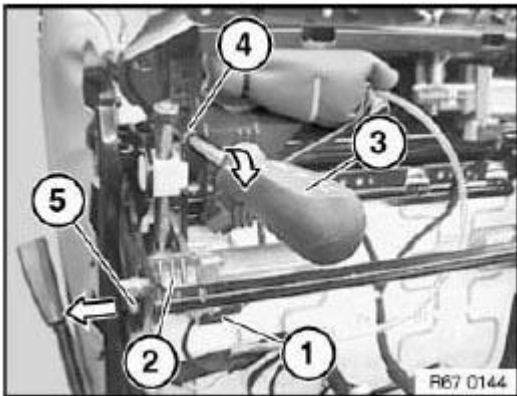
Inserting Suitable Slotted Screwdriver Into Receptacle
